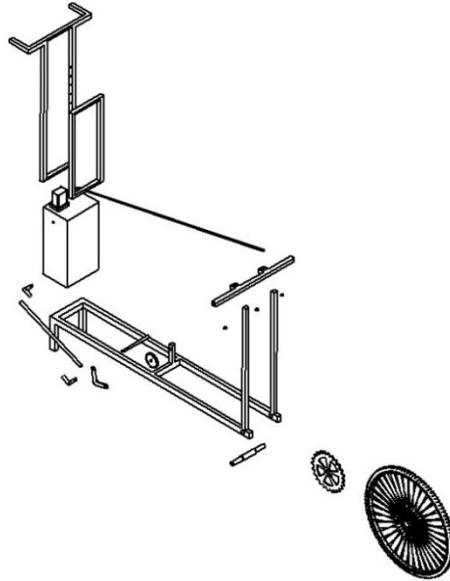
Disassembly Drawing of the Chemical Spray Trolley
